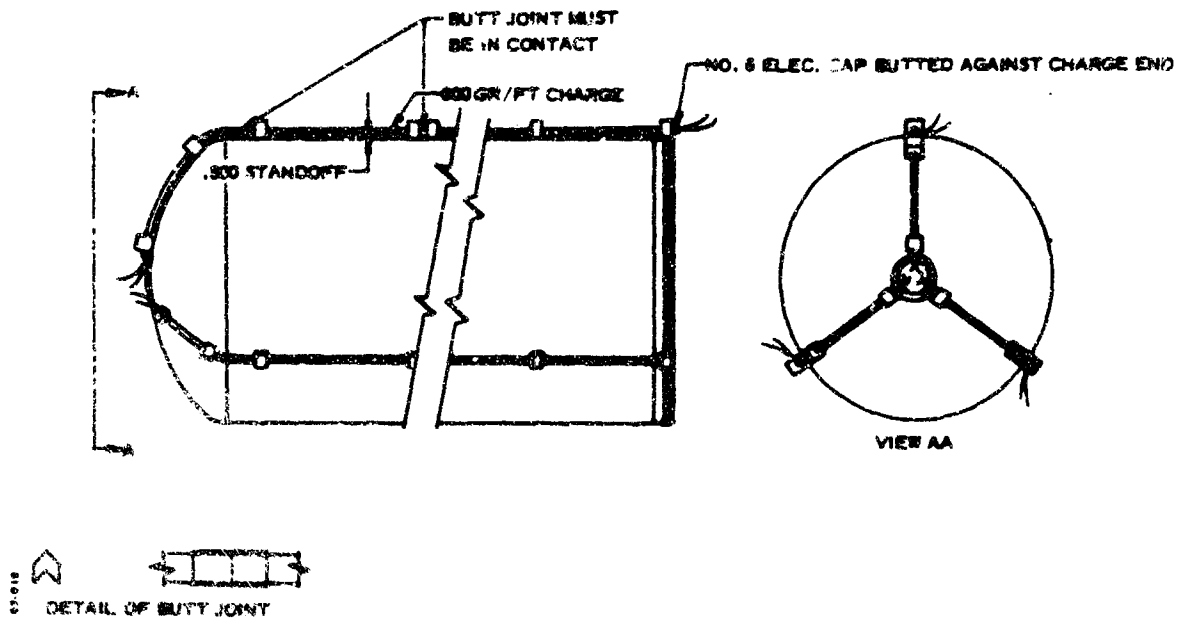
Sketch Showing Mounting of Linear Shaped Charge
